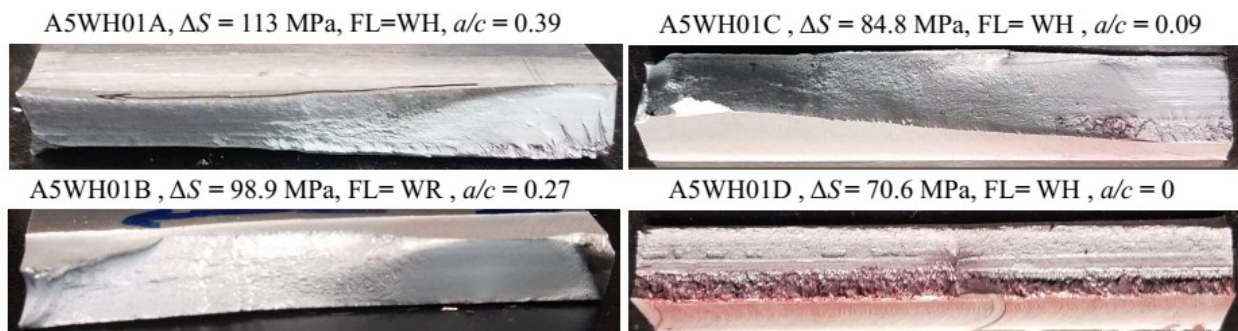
Fracture surfaces of specimens with wormhole defect
